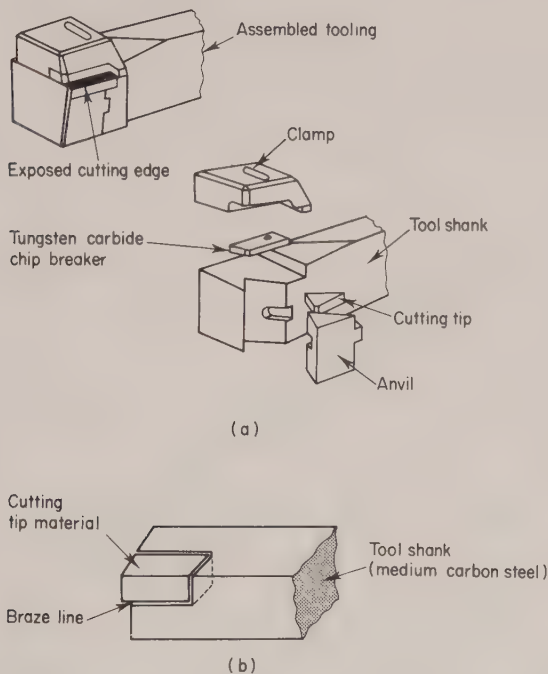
Basic forms of carbide tooling for single point cutting. (a) Modular 'throwaway' tip cutting tool system. (b) Typical brazed tip cutting tool.
